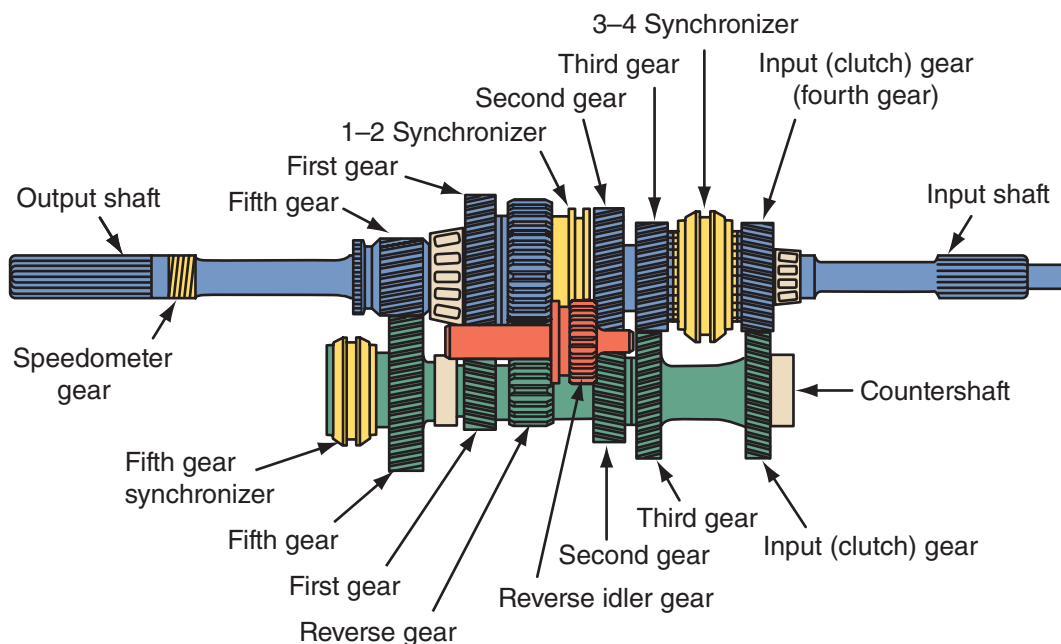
The arrangement of the gears and shafts in a typical five-speed transmission.
